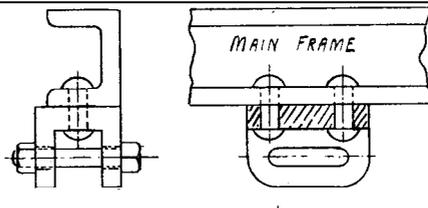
Two THUS FOR FORWARD ENDS OF REAR SPRINGS. (Full size.)
